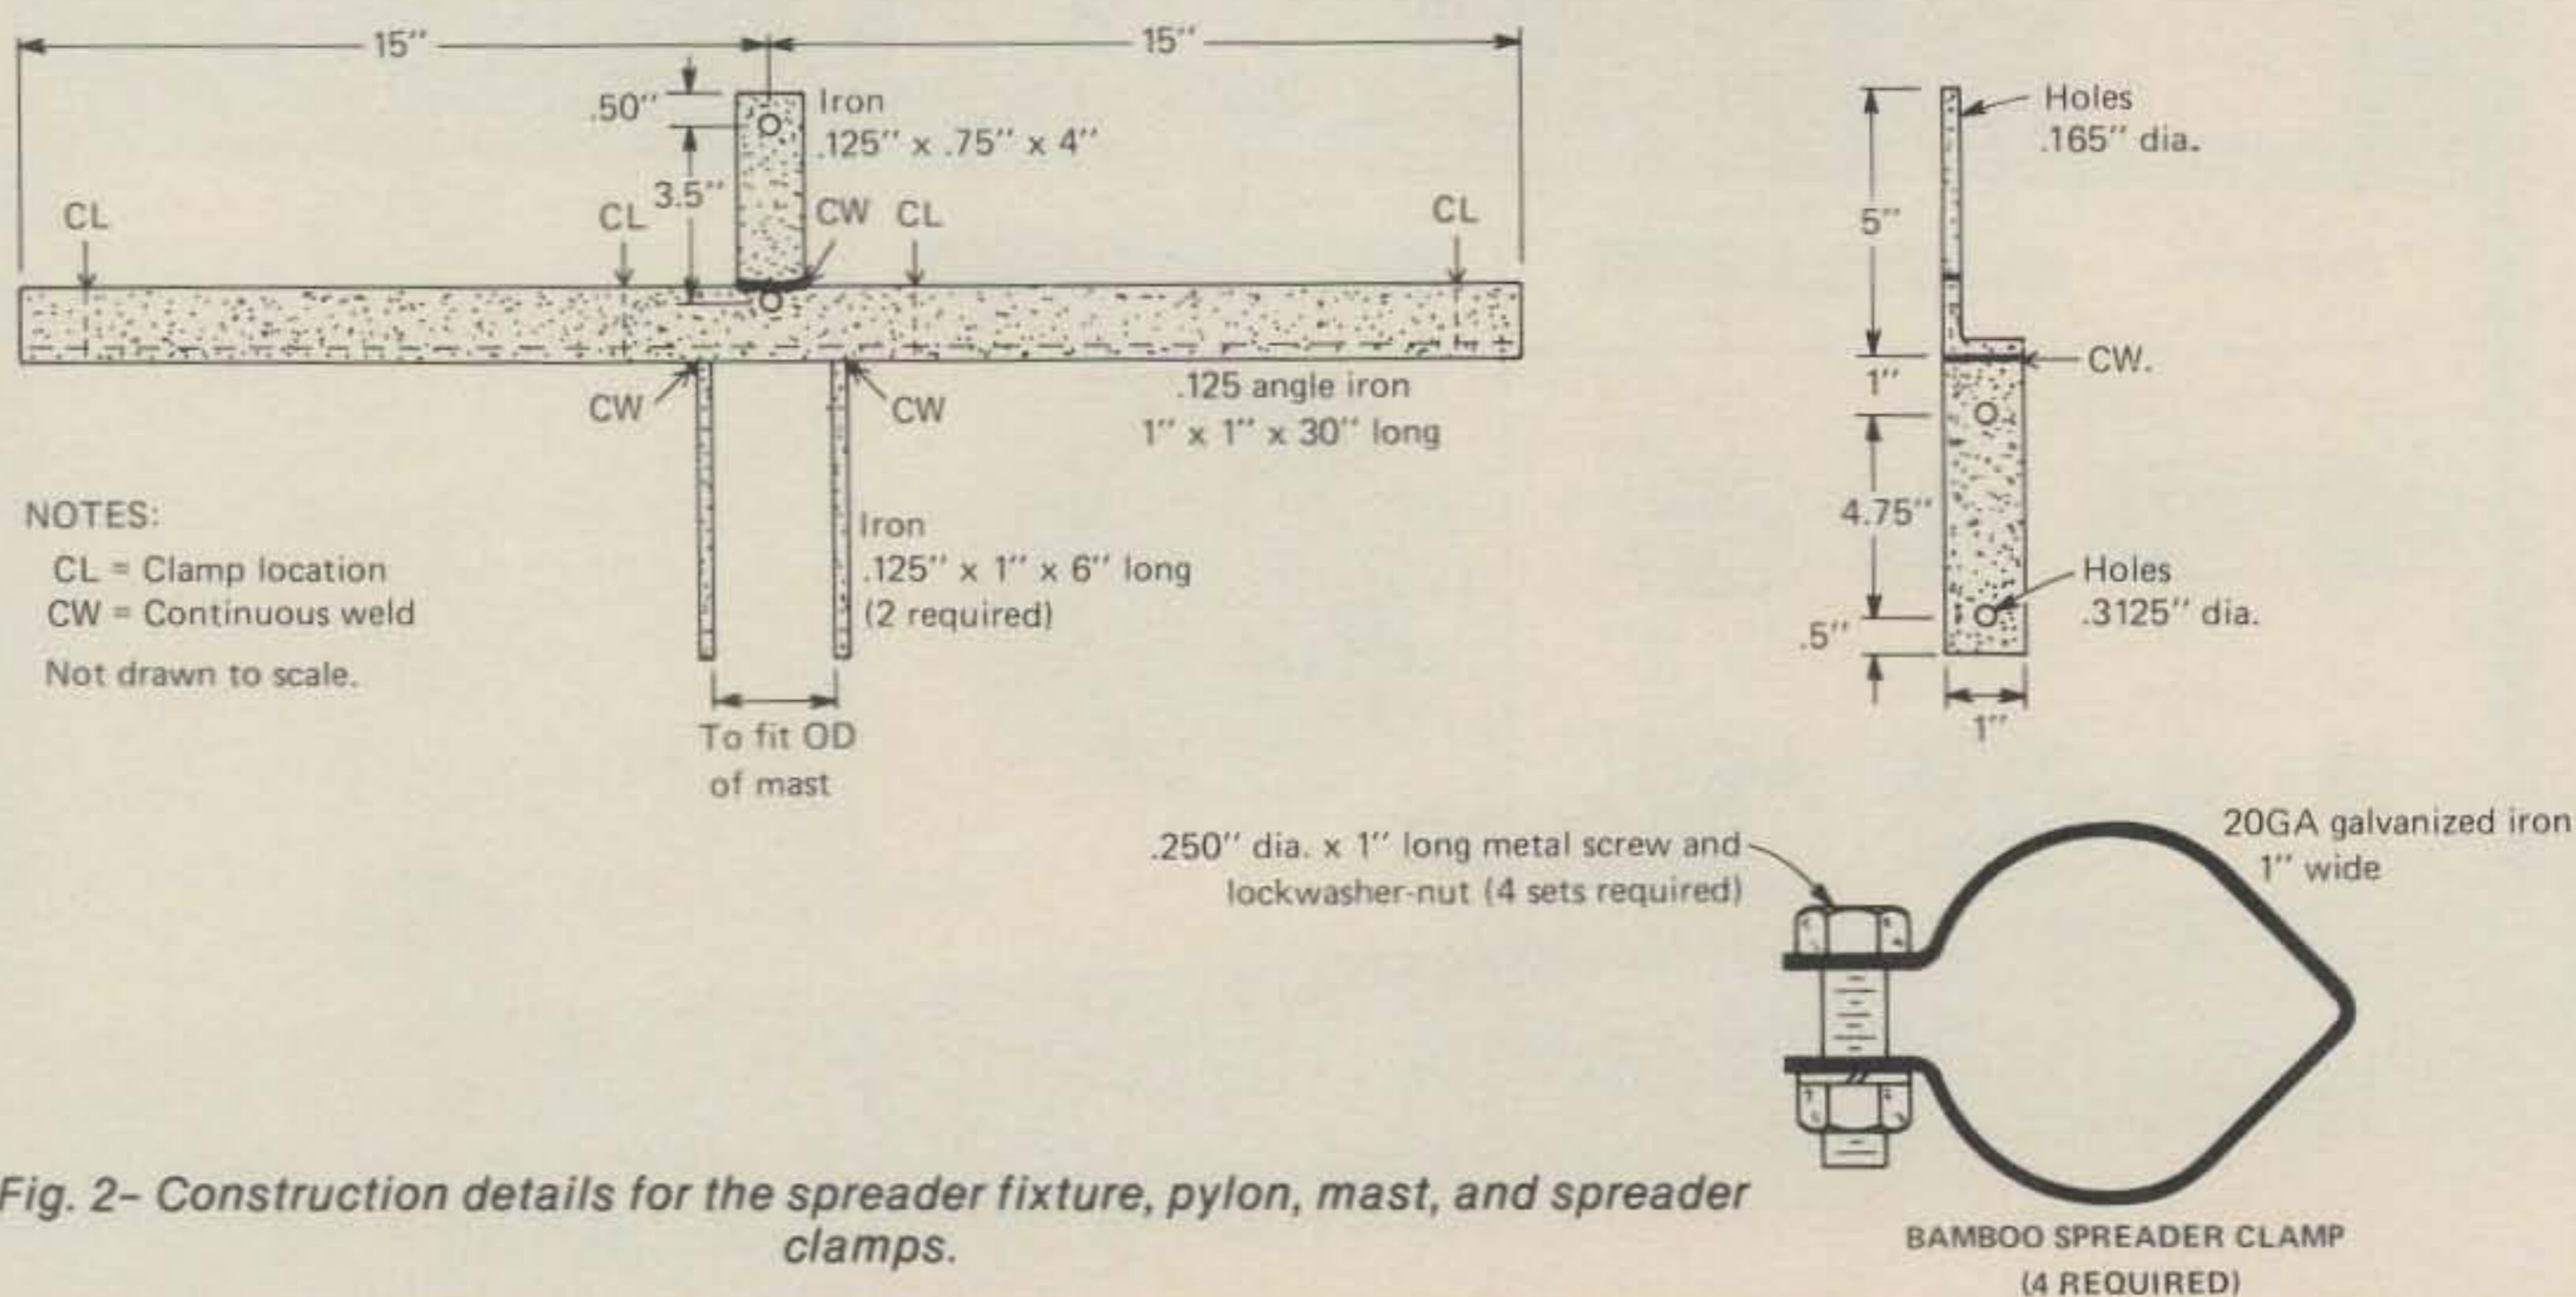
Construction details for the spreader fixture, pylon, mast, and spreader clamps.
